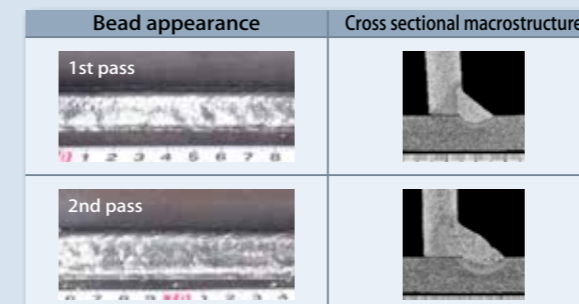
Bead appearance and cross sectional macrostructure in horizontal fillet welding
